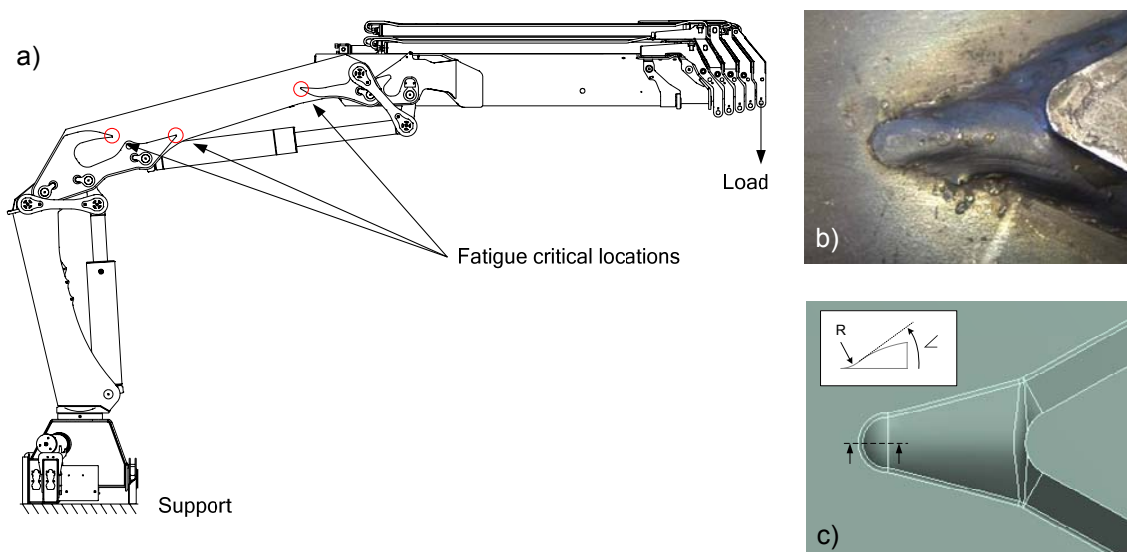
a) Crane with reinforcement detail, b) actual weld, c) idealized weld.
